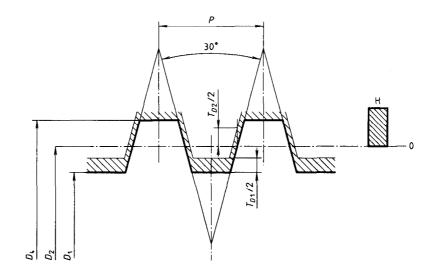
Nut threads with tolerance position H for the pitch diameter
